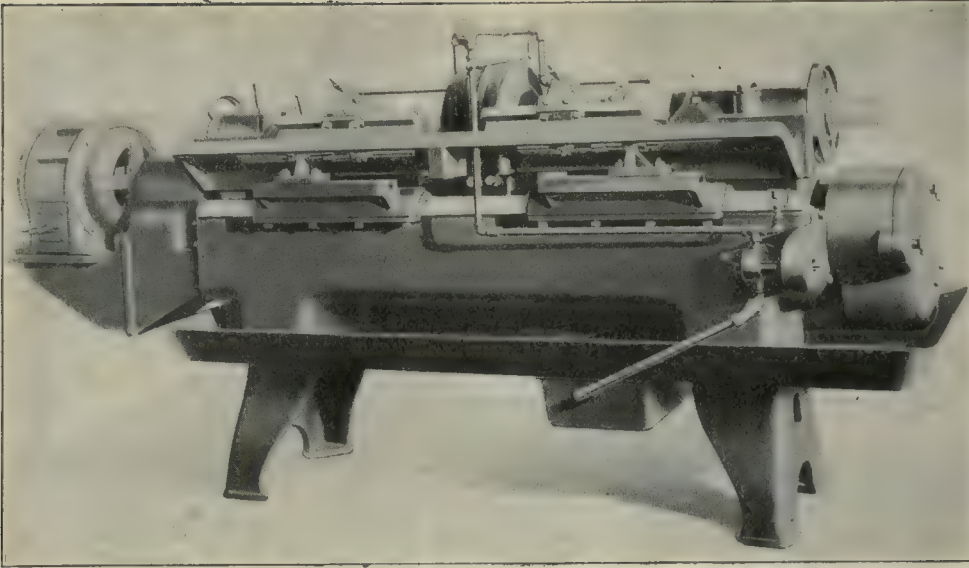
REAR OF MACHINE SHOWING BACK TOOL SLIDES
